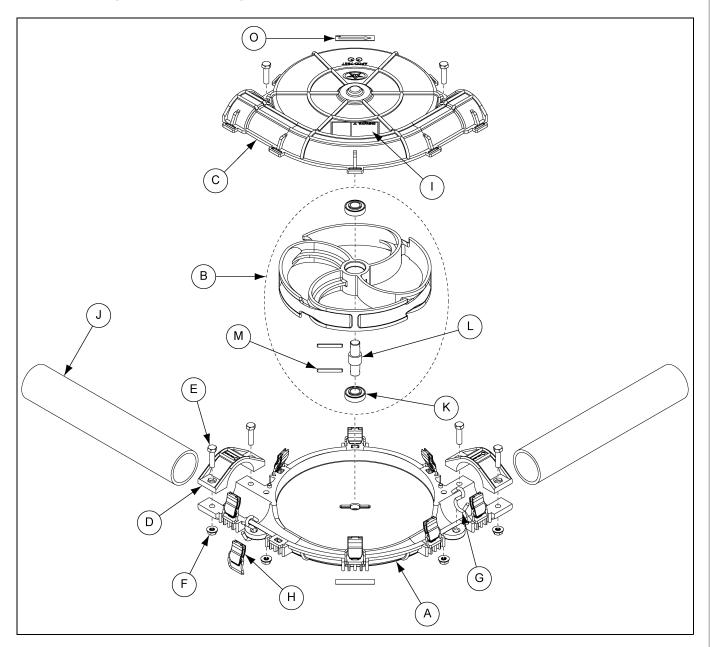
B Chain Disk Vertical Clear Corner Assembly with Latches
